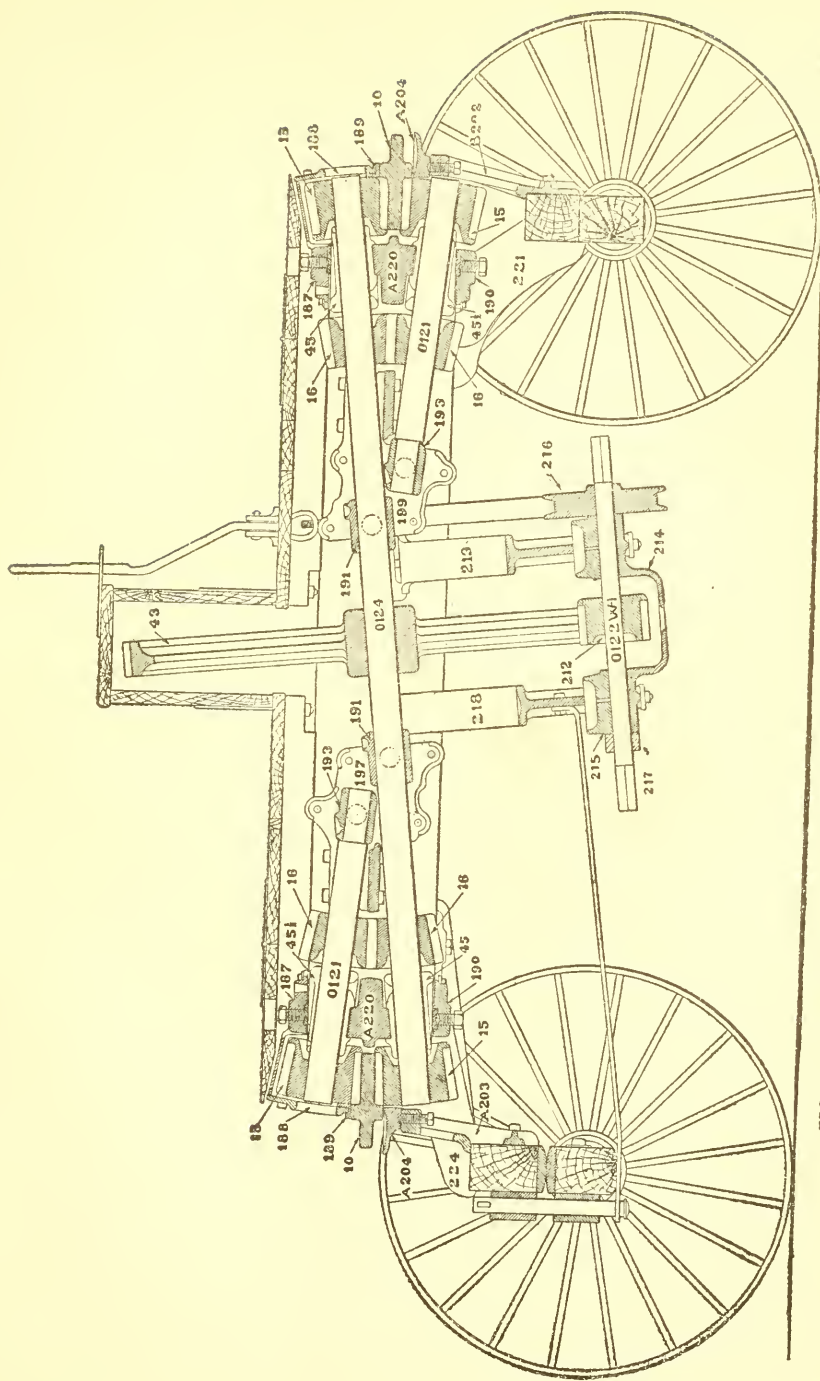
SECTIONAL VIEW OF 12 AND 14-HORSE IRON FRAME POWER.
